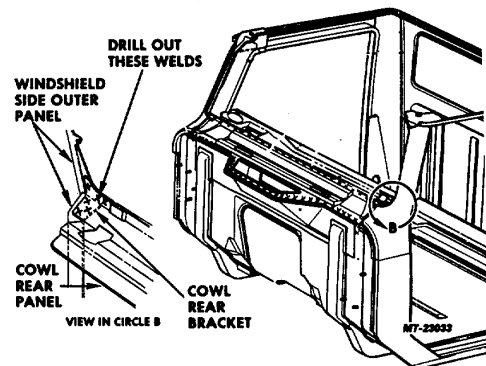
Windshield Side Outer Panel to Cowl Rear Panel and Bracket Spot Welds
